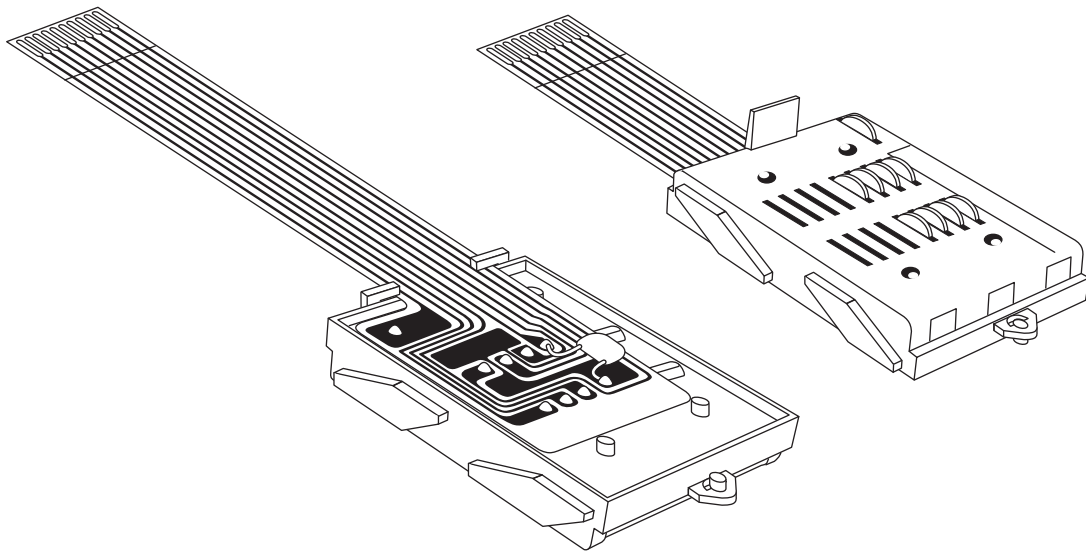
Smartcard Contact Blocks, Cable And Contact Sides, Extended and Regular Cables
